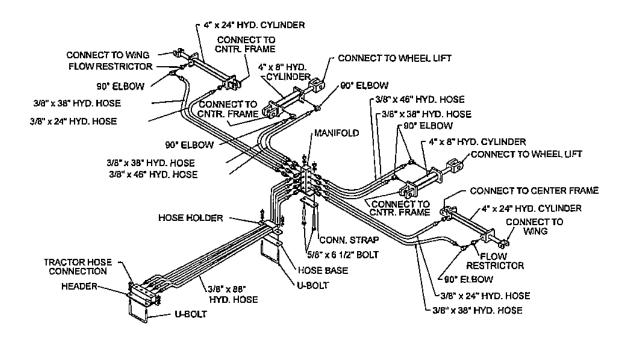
HYDRAULIC CIRCUIT ASSEMBLY
